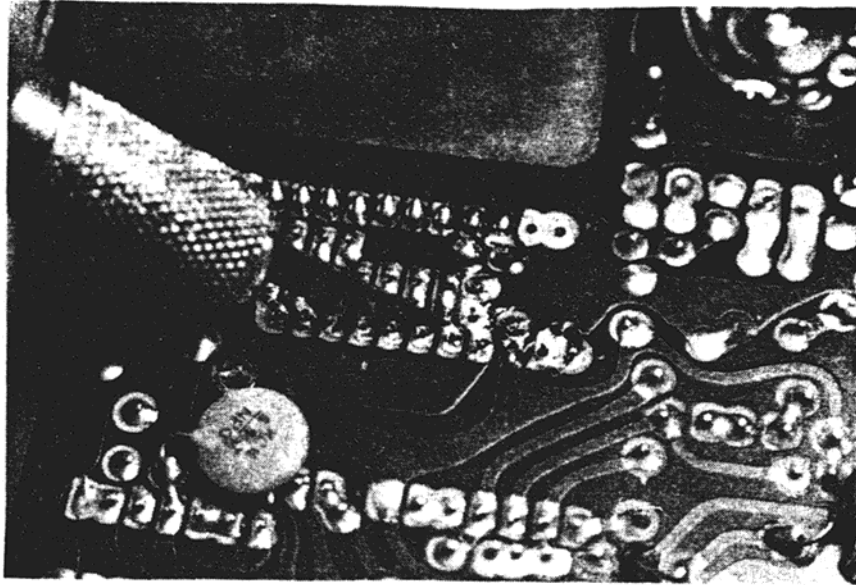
Clean solder off foil between PLL and filter components before cutting the conductors.
